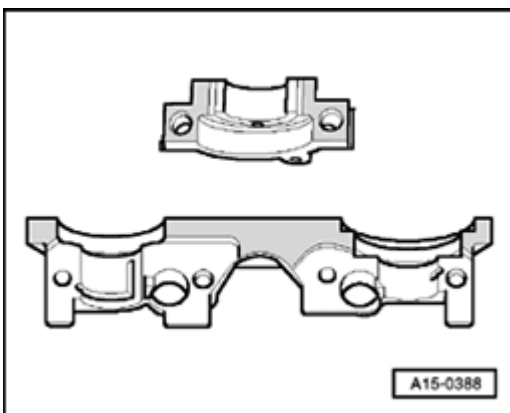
Coating Hatched Surface Of Double Bearing Cap As Well As Outer Bearing Cap Next To
